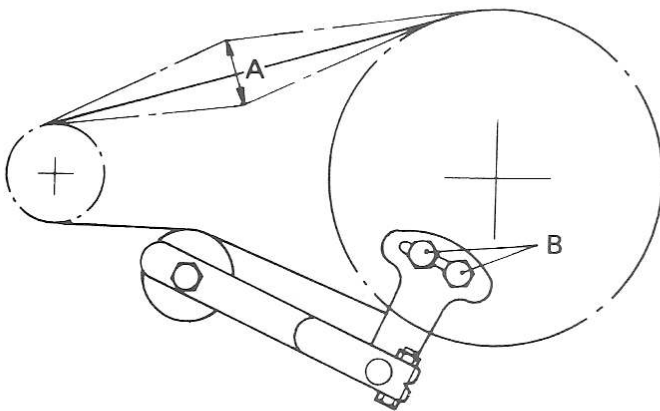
On models with a chain tensioner that bears on the lower chain run, the free play is checked at A (the tensioner can be adjusted by loosening bolts B) (Sec 5)
